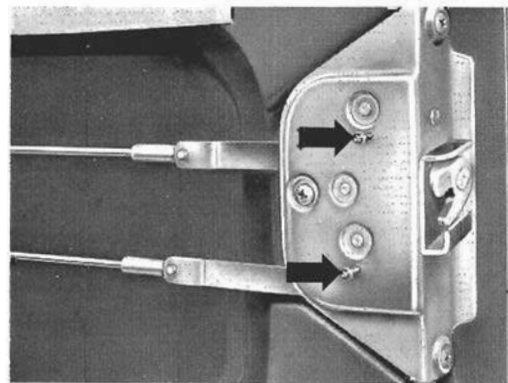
Screws (arrows) being used to secure the operating levers inside the center lock.
